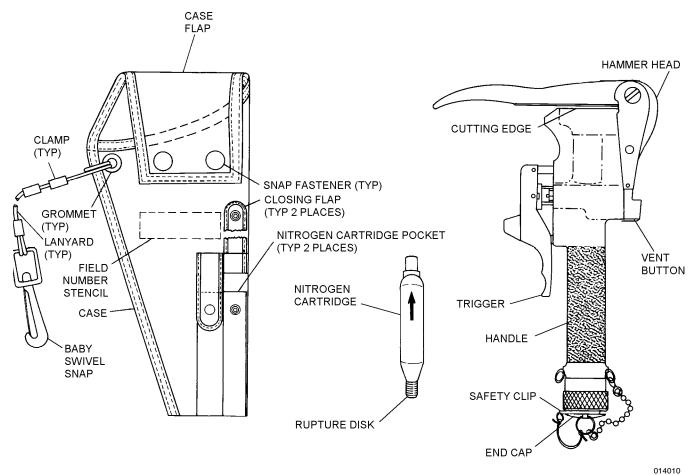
Pneumatic Rescue Hand Tool and Case, Parts Nomenclature
